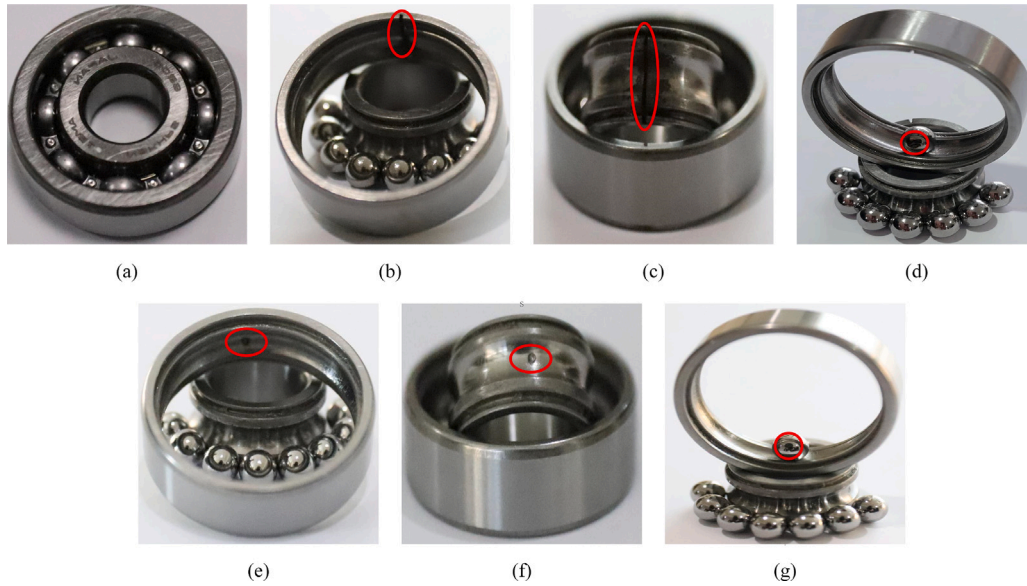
Seven statuses of bearings in the experiment: (a) normal bearing, (b) outer race with crack, (c) inner race with crack, (d) ball with crack, (e) outer race with pitting corrosion, (f) inner race with pitting corrosion, and (g) ball with pitting corrosion.
